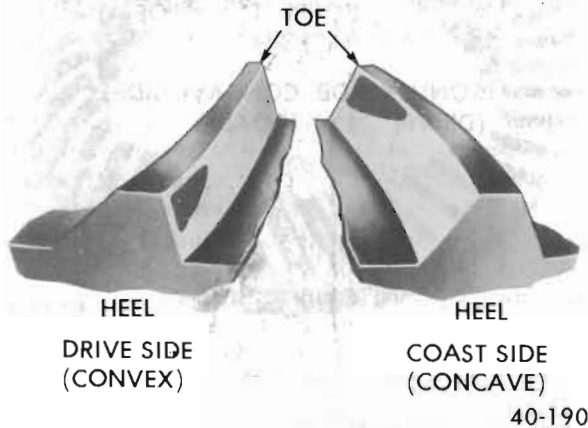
Tooth Pattern - Pinion Too Far Away From Ring Gear (Insufficient Shim Thickness)
